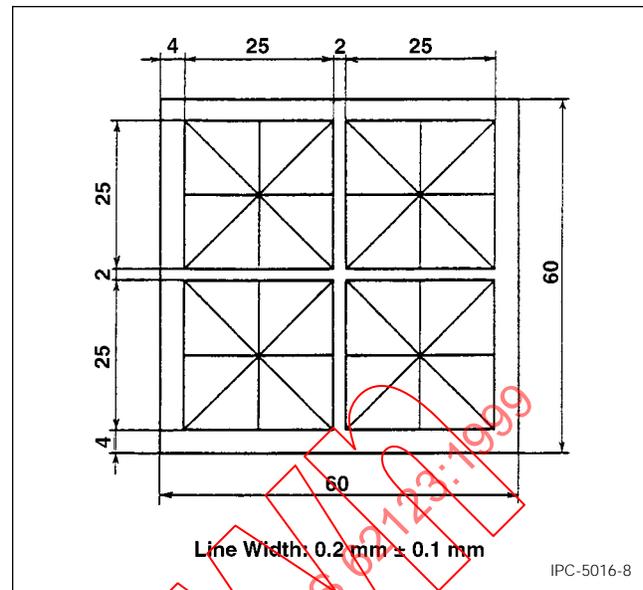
Specimen for Resistance to Soldering Heat and Resistance to Chemical (for symbol marking)
